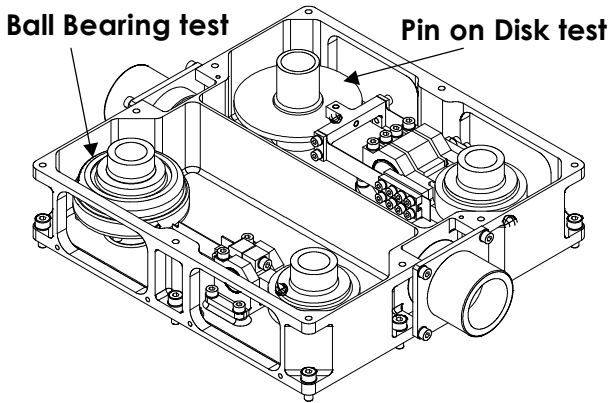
VTM experiment cell view showing the pin on disk test (right) and the ball bearing test (left).
